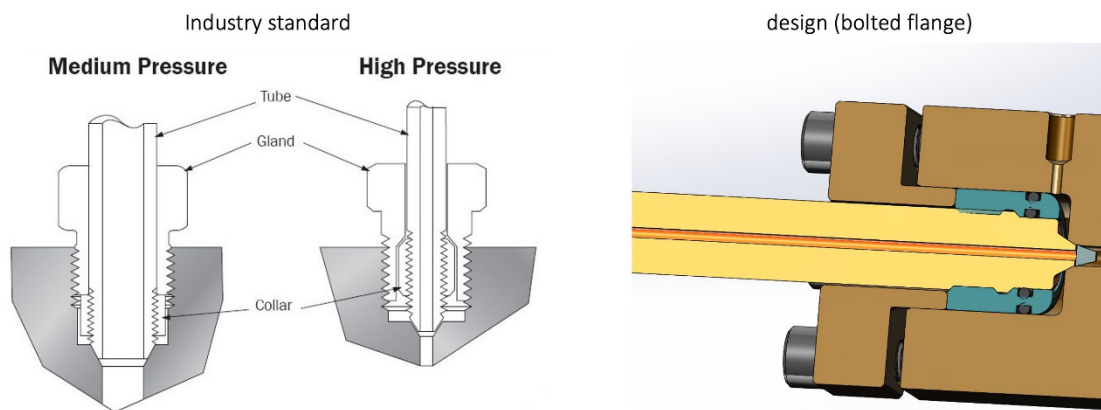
Commercial fittings generated seat compression with a single gland nut, which transmits torque into the tube. Callisto fittings generate seat compression with bolts and no torque is transmitted into the tube.
